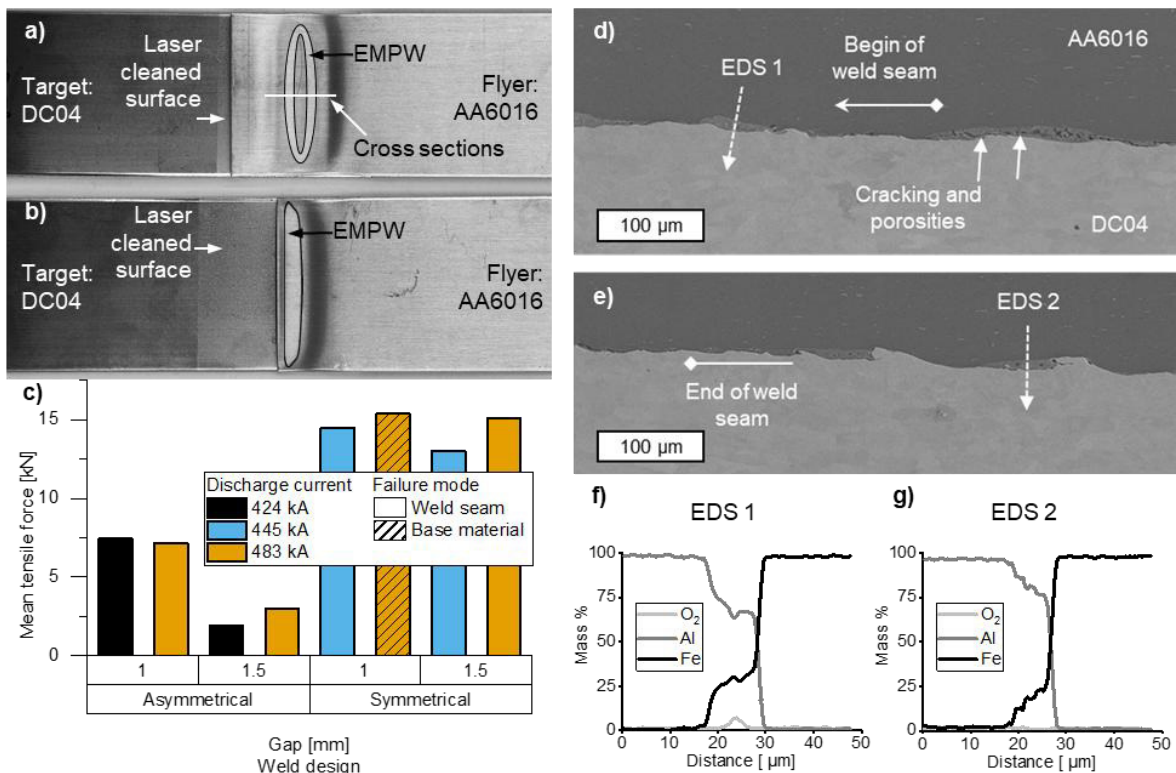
Welding process window of AA6016-T4 (flyer) and DC04 (target).
